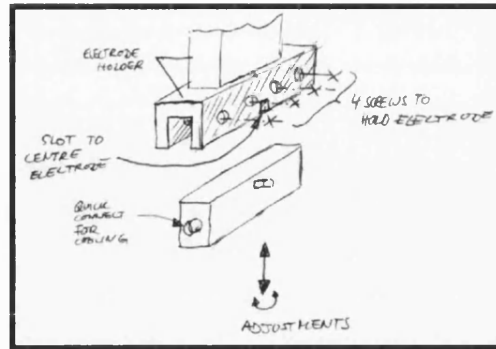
Electrode bolted to welding station with 4 screws. Horizontal alignment achieved with a centring bolt.
